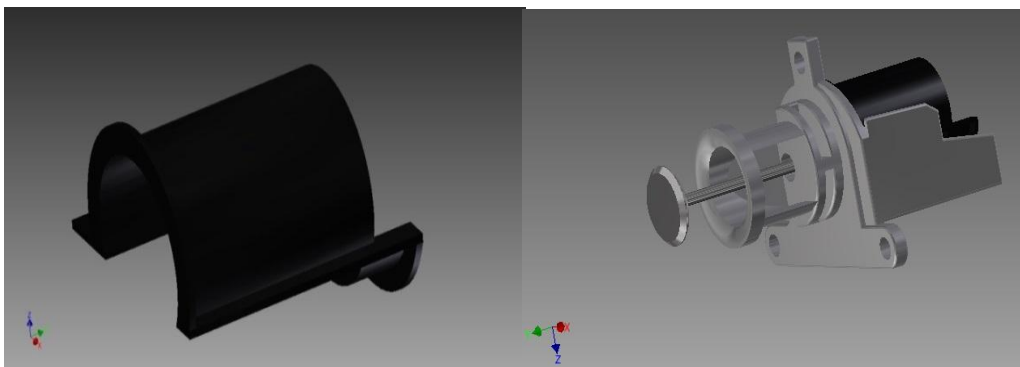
, EGR Casing Cover view Fig-5, EGR Valve Assembly View
